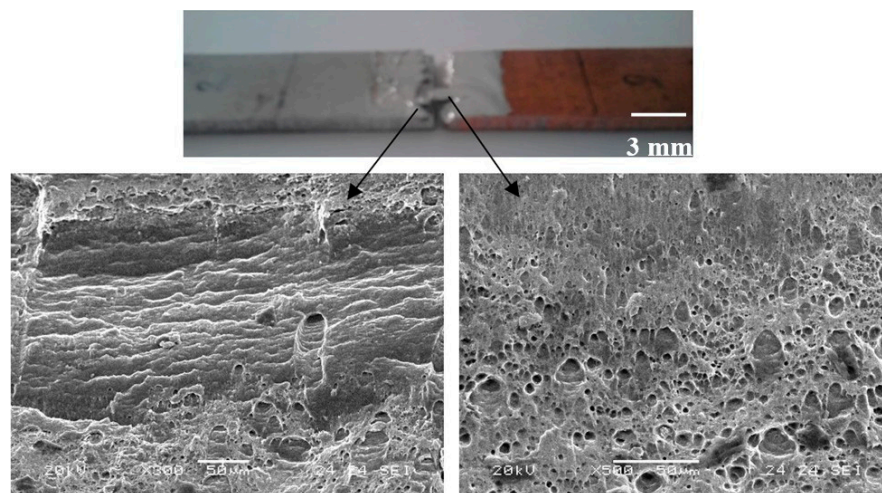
Surface images after tensile tests and SEM images of ruptured surface of welded joints in the 630/50/1 specimen.
